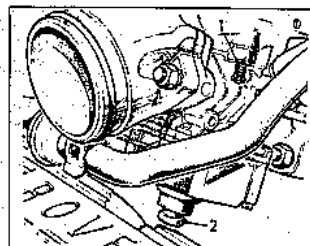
Carburettor mixture adjustment (early models) (Sec 15)
